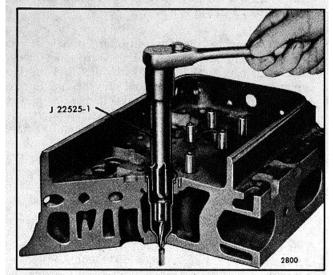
Reaming Injector Tube for Injector Body Nut and Spray Tip
